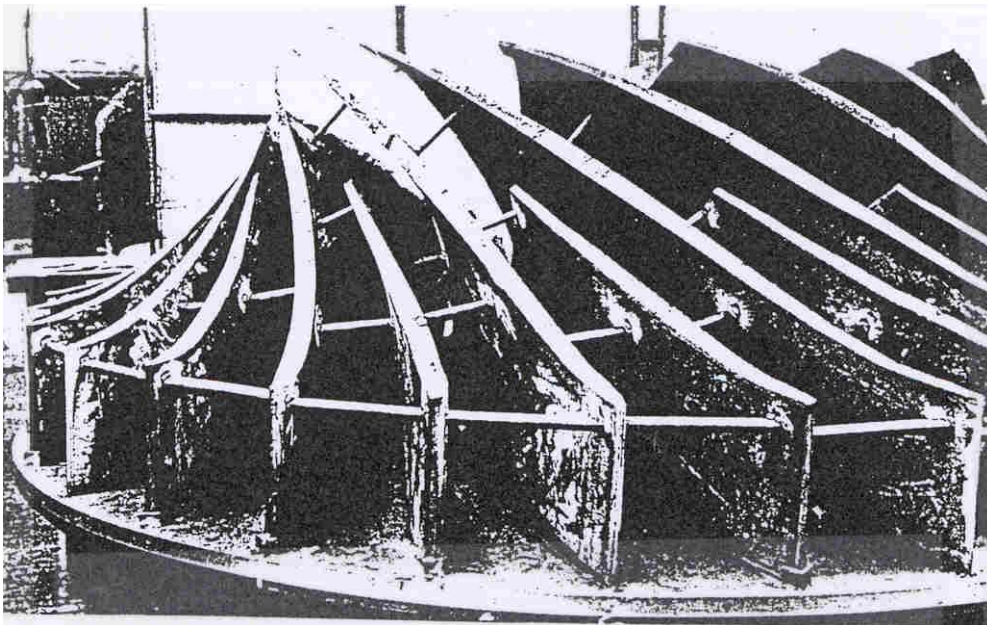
A splitter blade runner in fabrication. (Courtesy Kværner)
